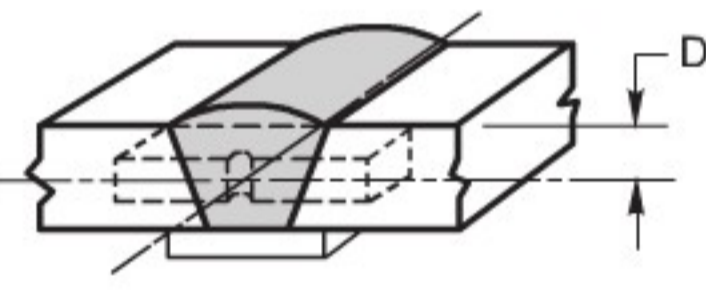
Weld Pad for Chemical Analysis of Weld Metal
